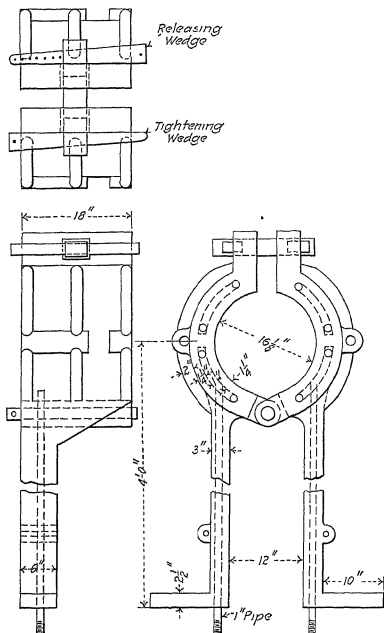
16-IN. HINGE-TYPE HOLDER, FURNACE NO. 1.
